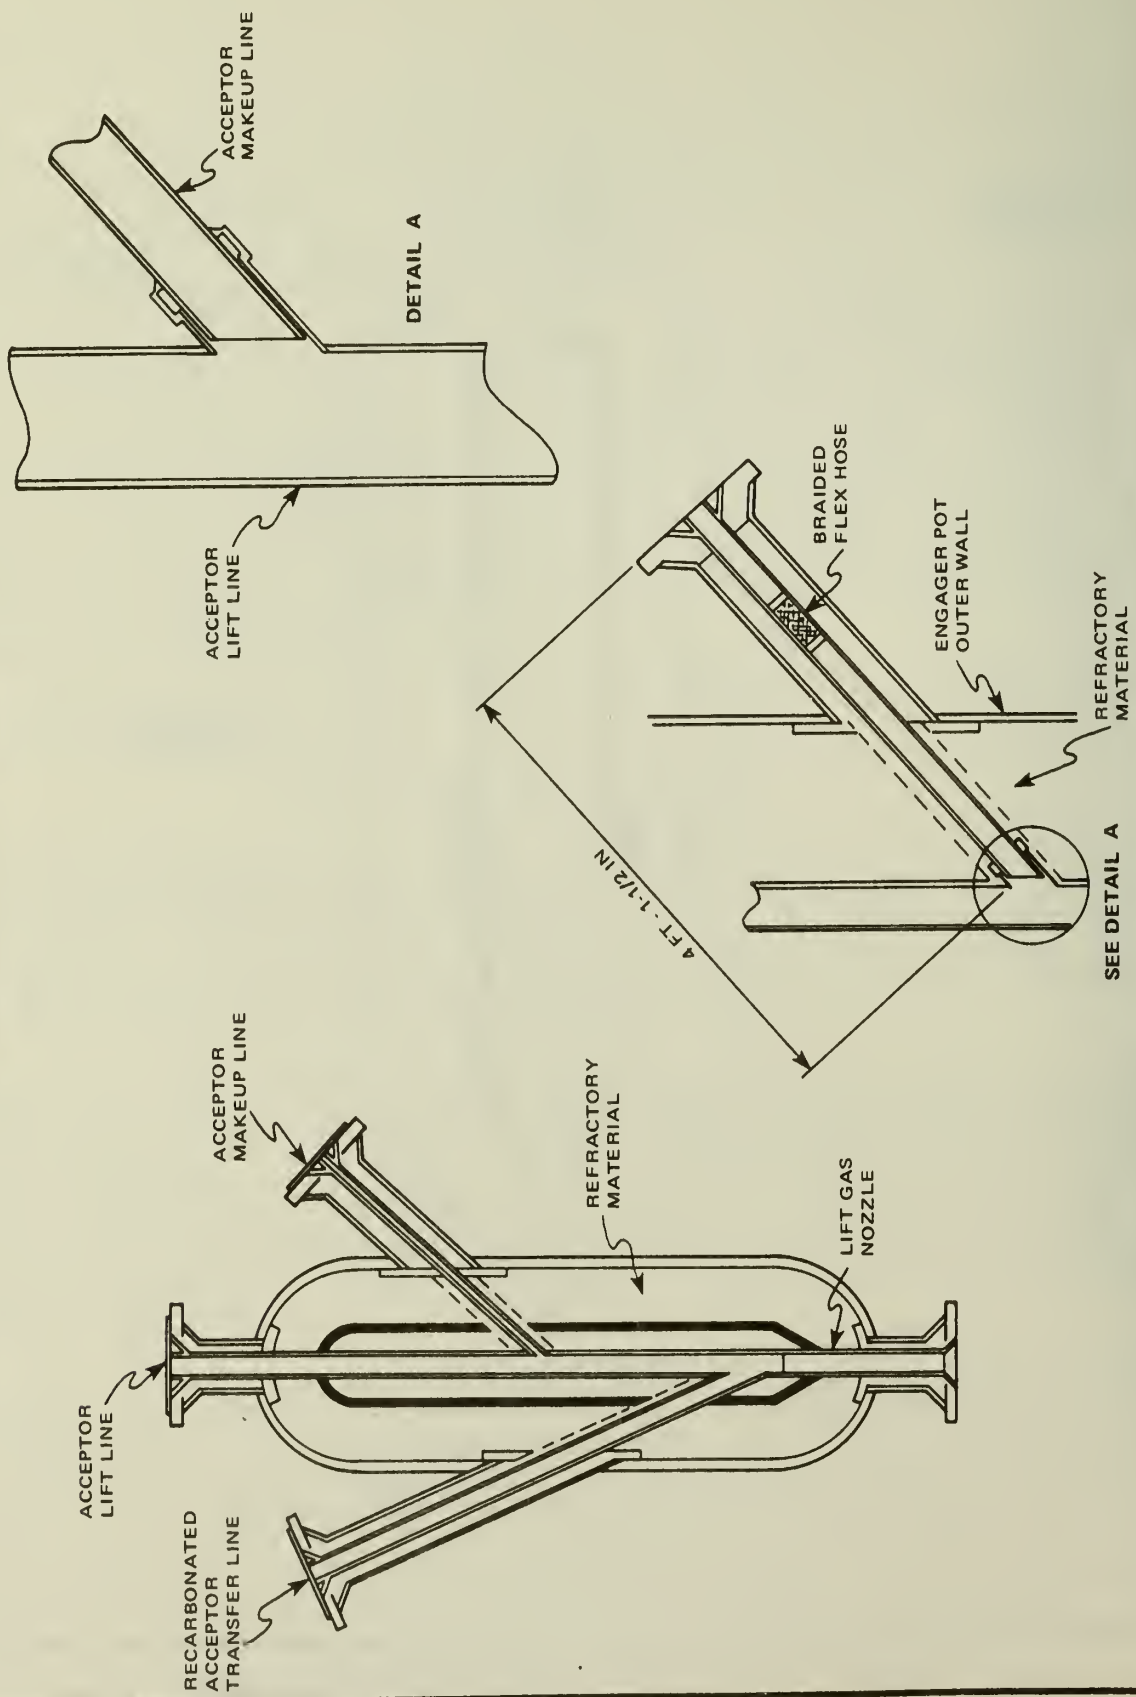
ENGAGER POT MODIFIED DESIGN
